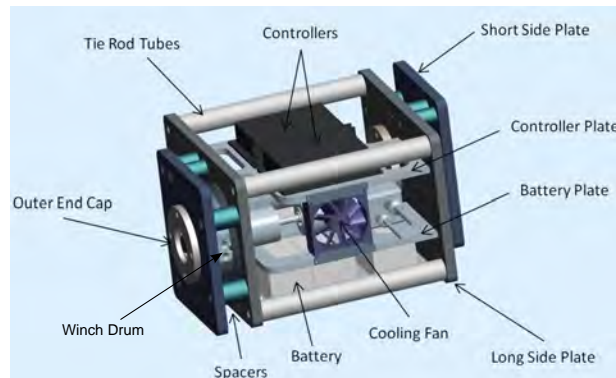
3D CAD Model of the Electronic Steering Unit [58]
